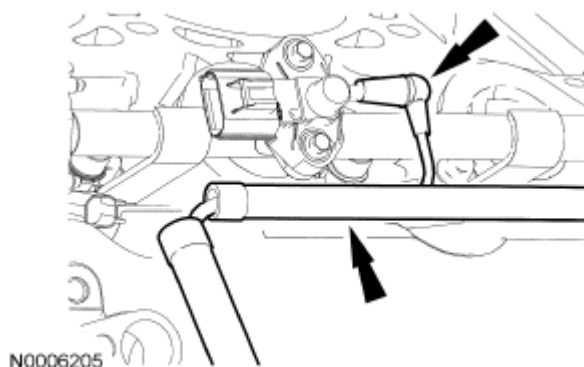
Identifying Fuel Pressure And Temperature Sensor Vacuum Hose Fitting
